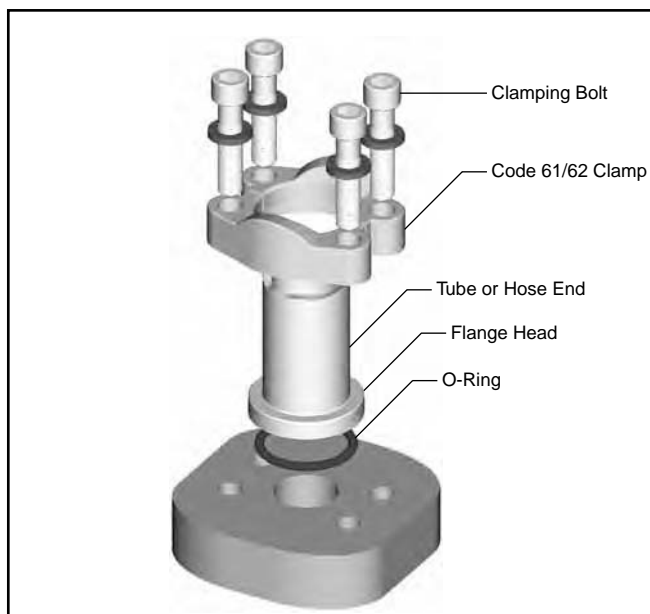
Four-Bolt Flange Connection (SAE J518)
